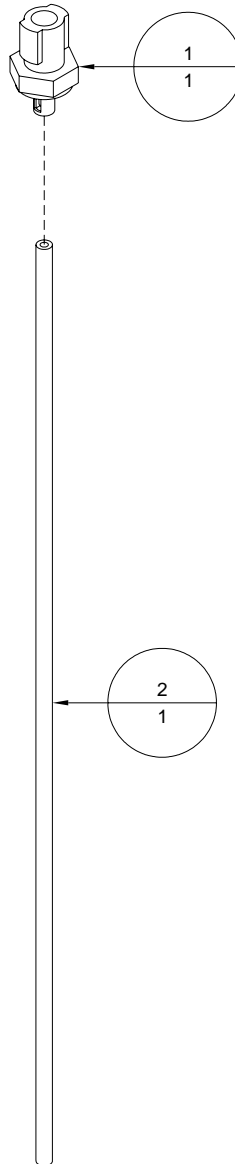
Lung Vacuum Hose Assembly (9101697A)
